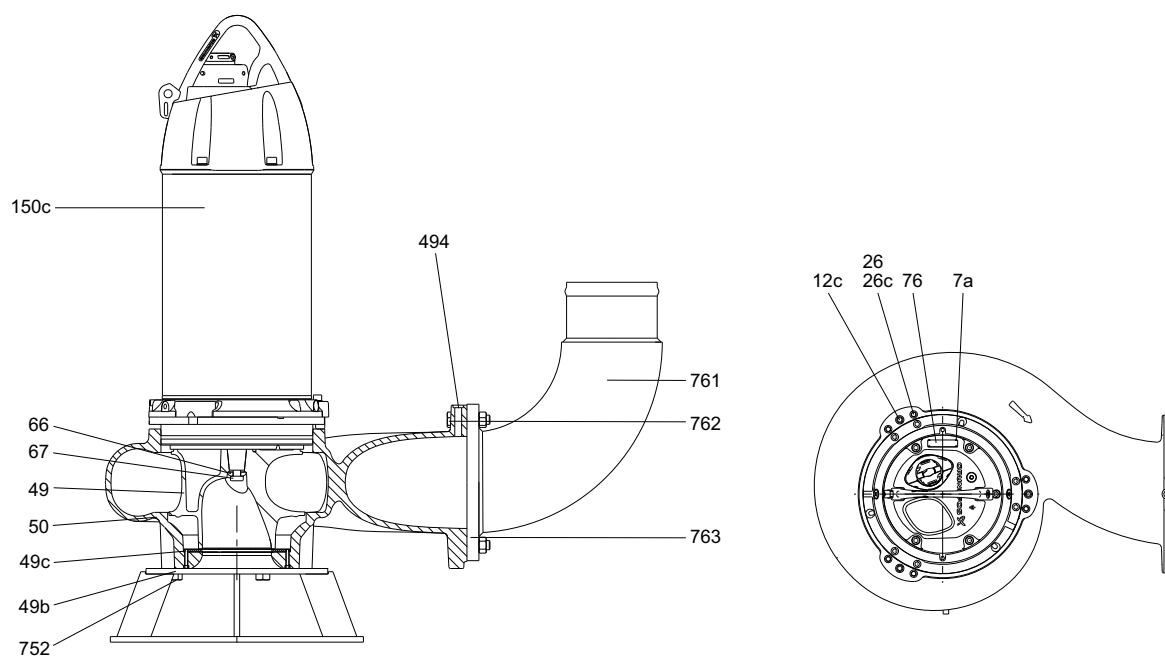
SE pump, dry installation on concrete foundation (recommended for SE pumps from and above 15 kW)
